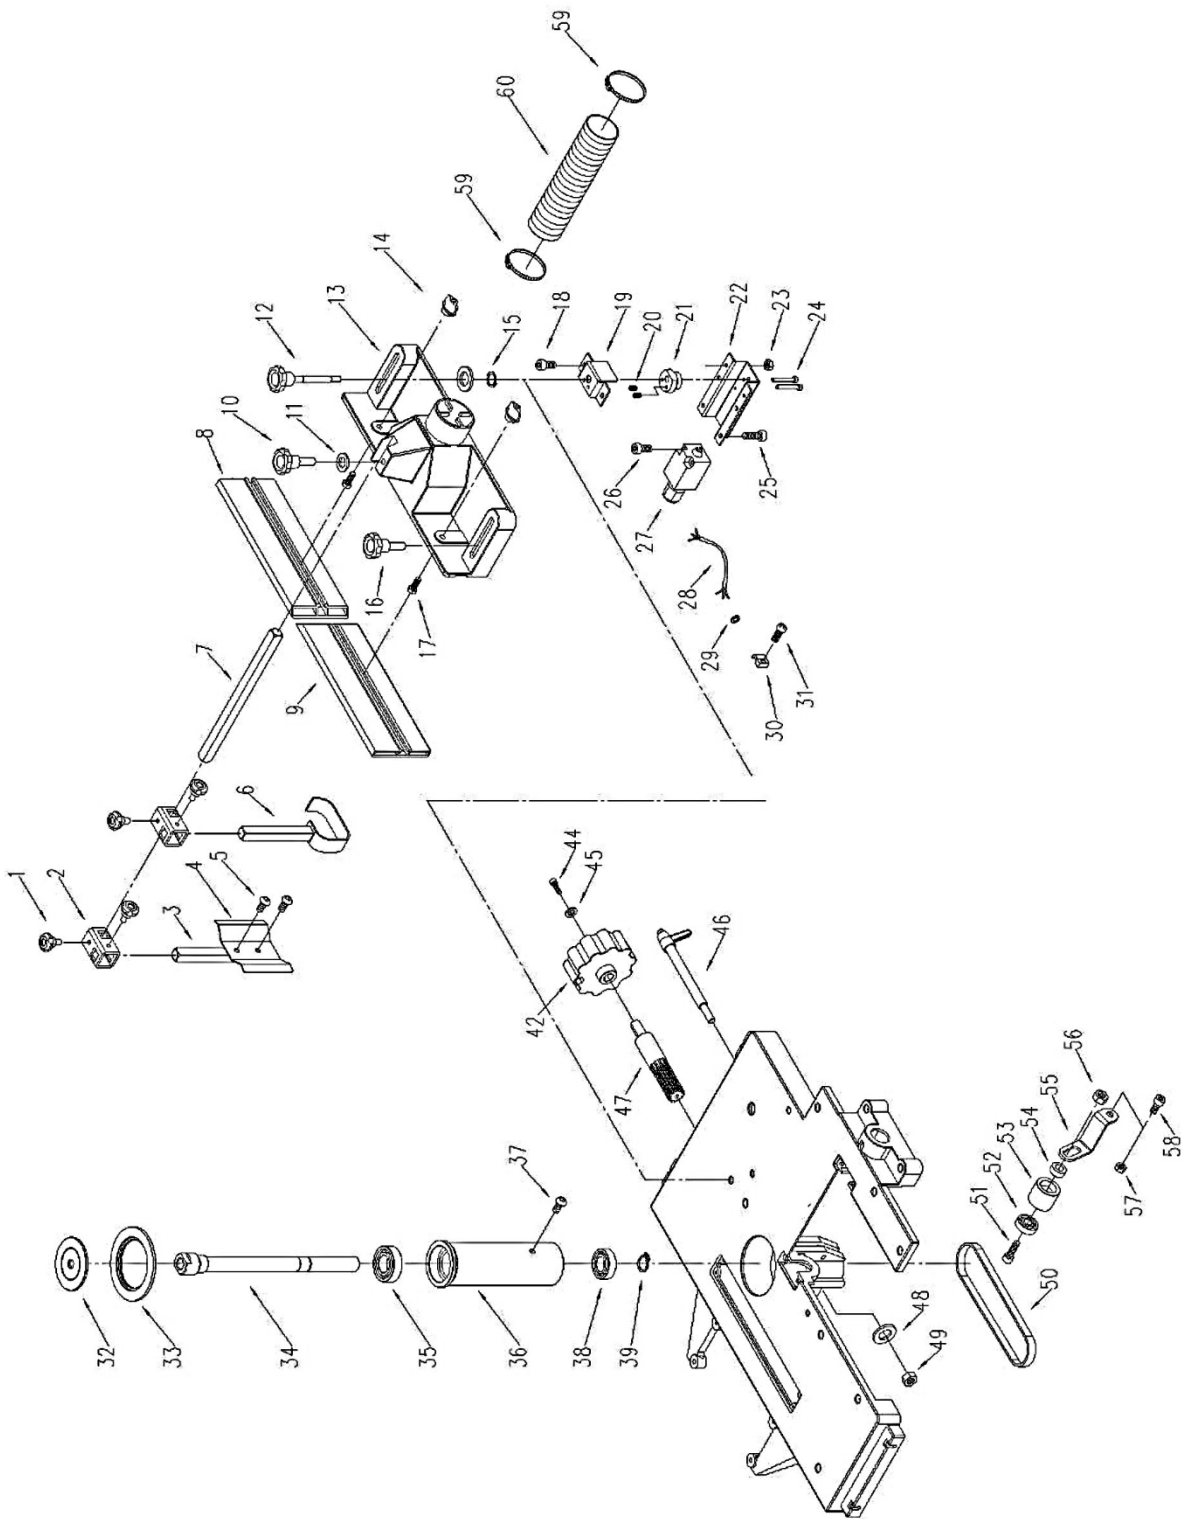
Spare parts drawing 4 Universal multiple combination machine UMK 6
